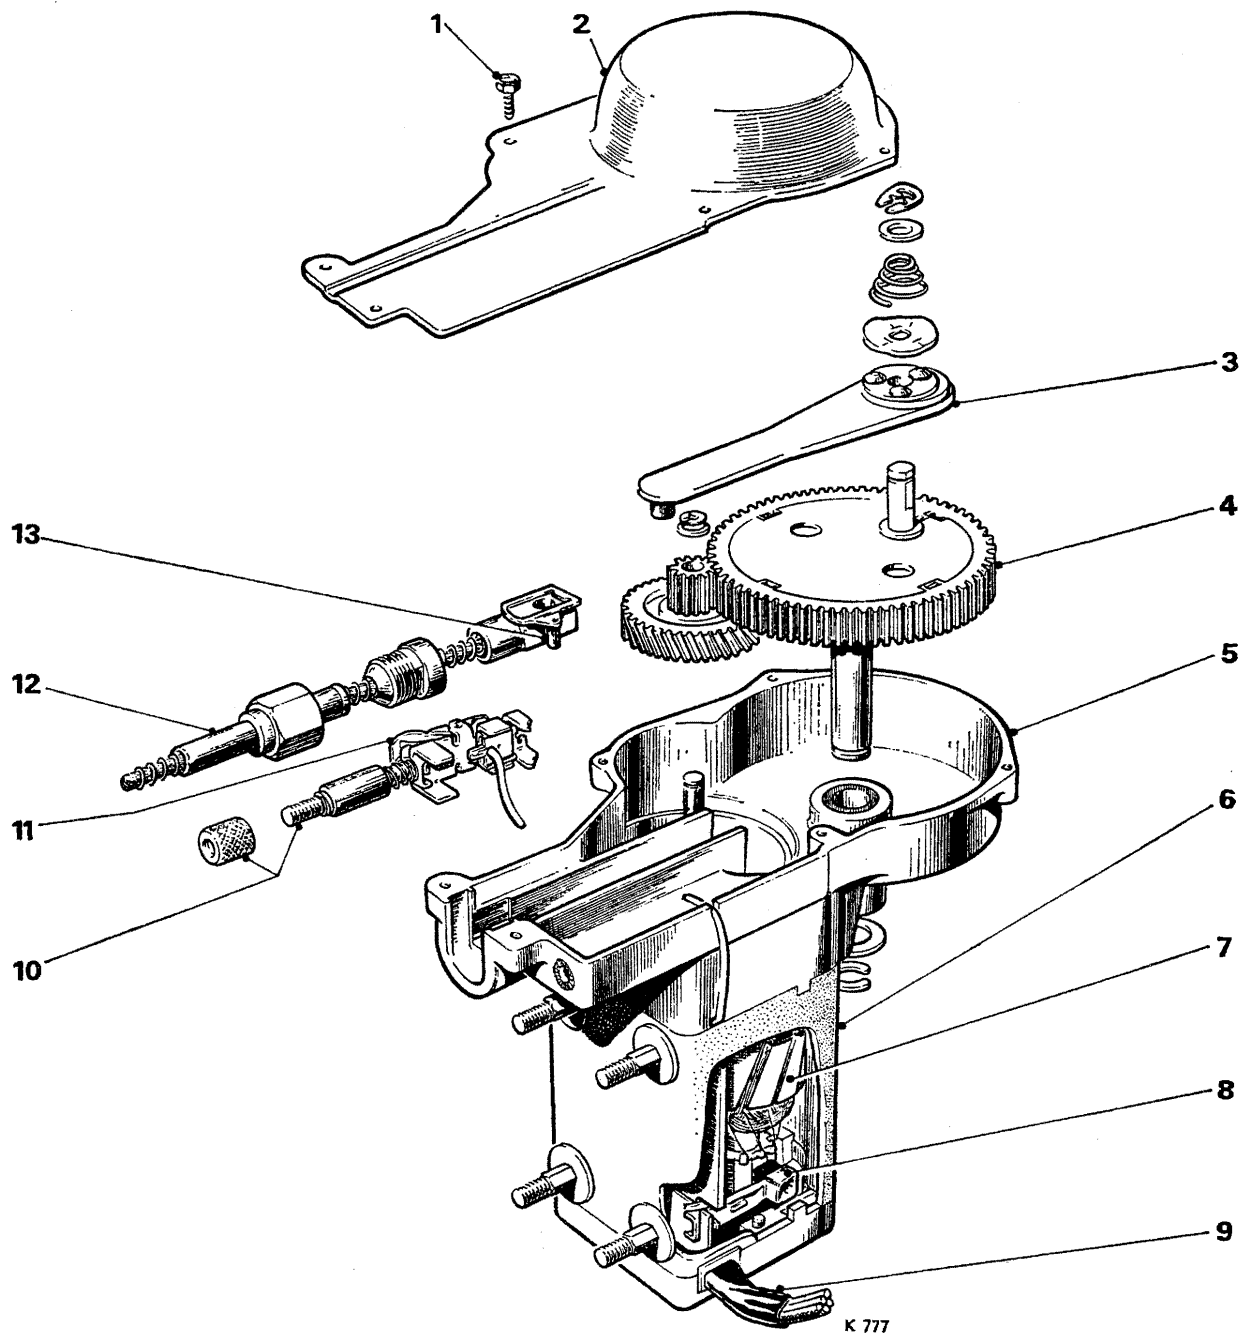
EXPLODED VIEW OF 'LUCAS' 6 W WIPER MOTOR
